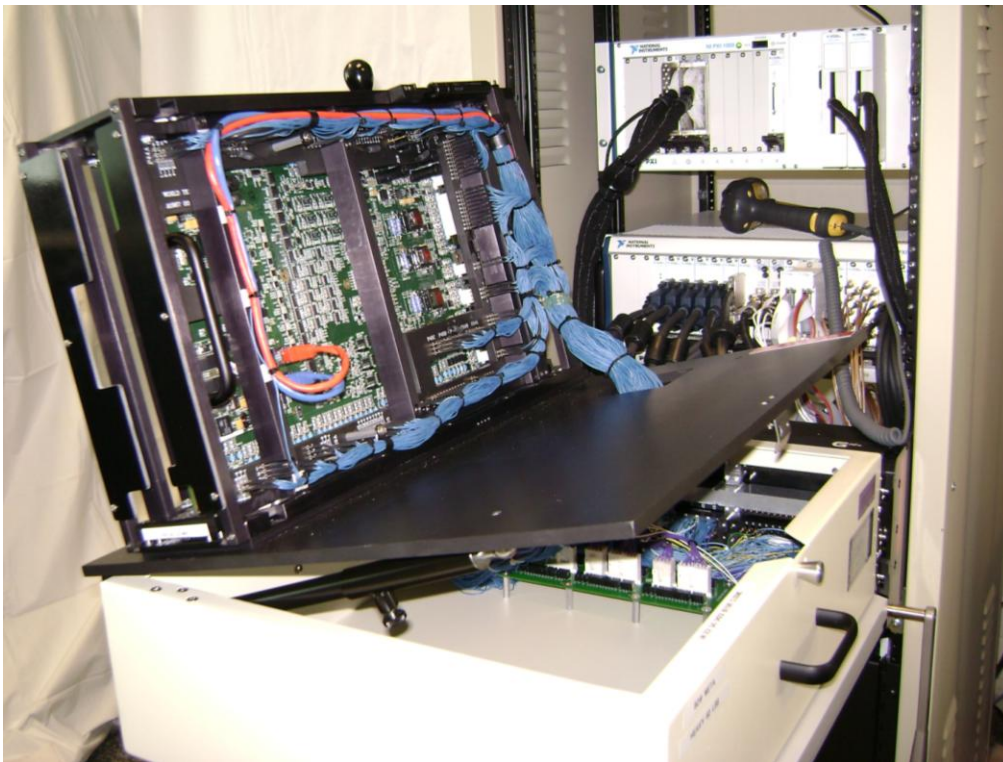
The Control Board Inserted Into the Fixture, Connected to the PXI Test System
